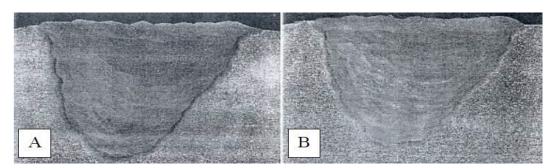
Macrostructure of weld No. 3 - cross-section A and B
